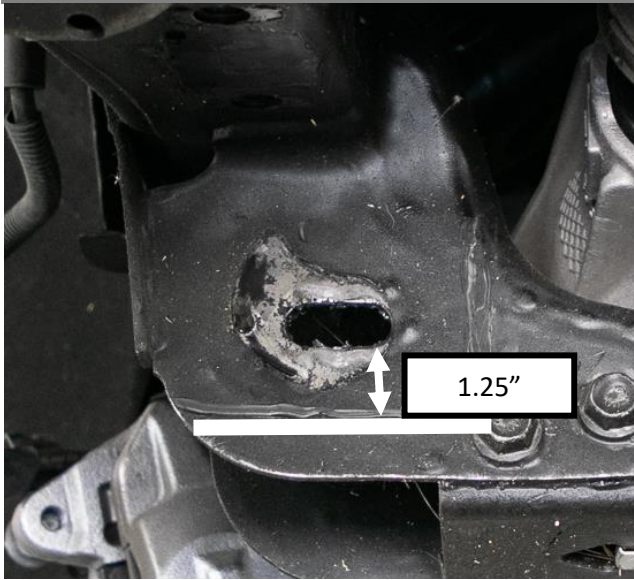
Passenger's Side Rear Crossmember, Only Trim Front Face
